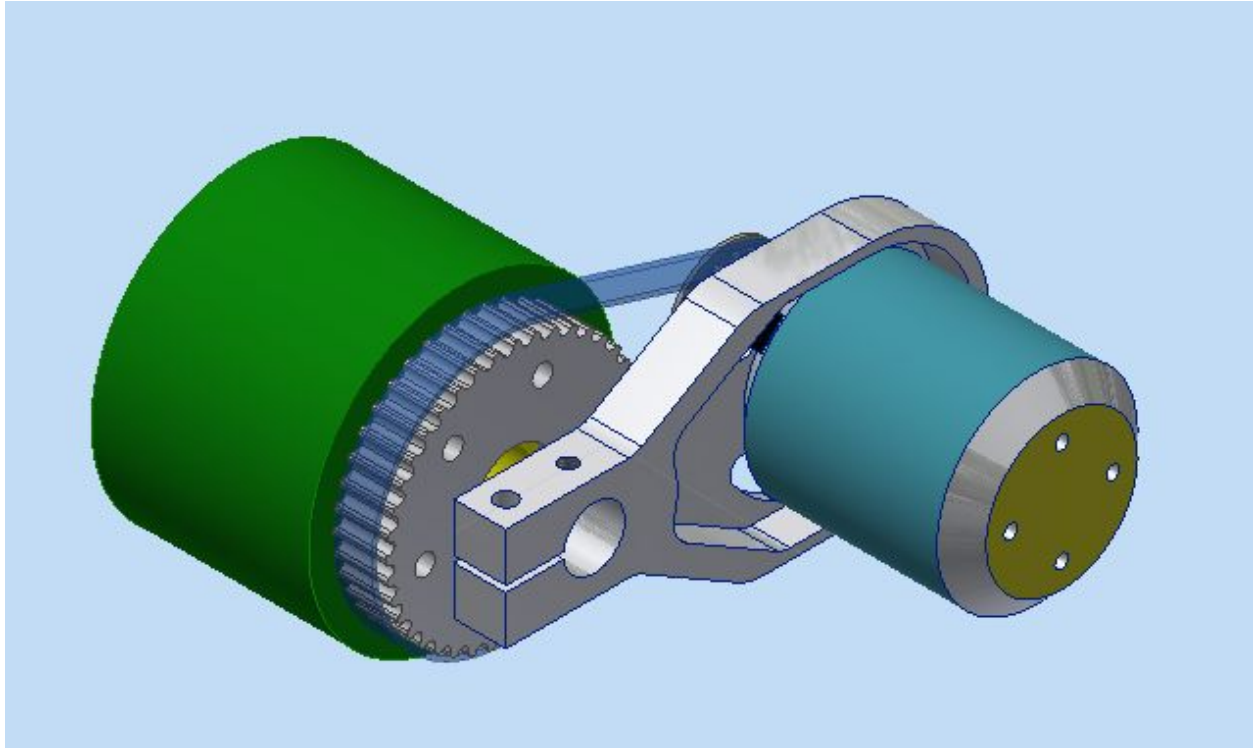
CAD model of the skateboard's belt transmission and motor mount. The outrunner motor mounts to a custom mounting bracket that is secured to the skateboard's front truck.
